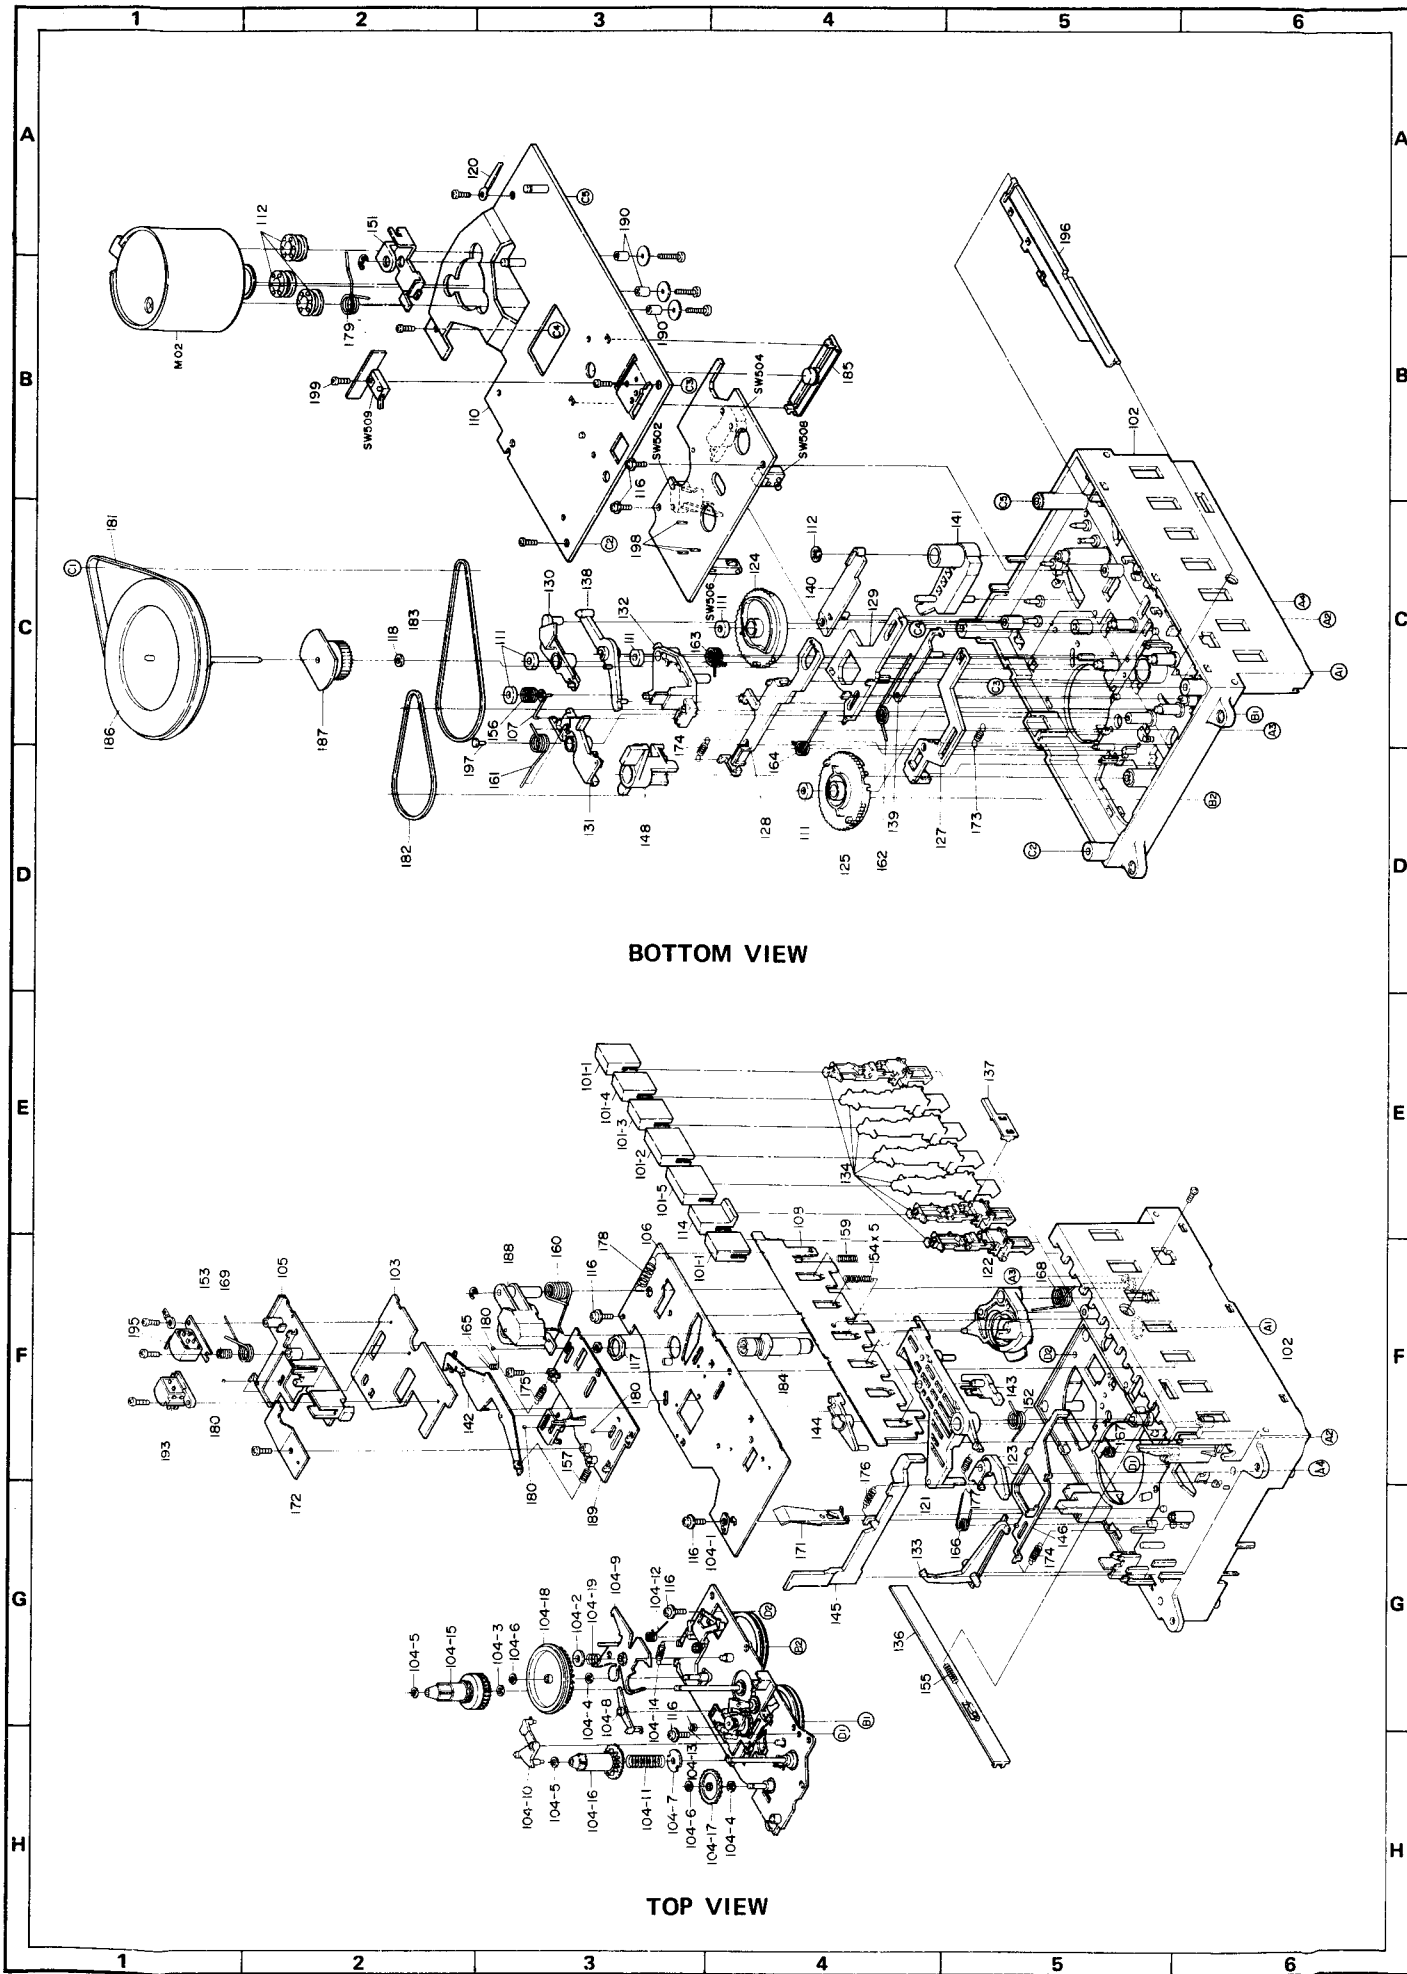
DECK 2 MECHANISM EXPLODED VIEW
